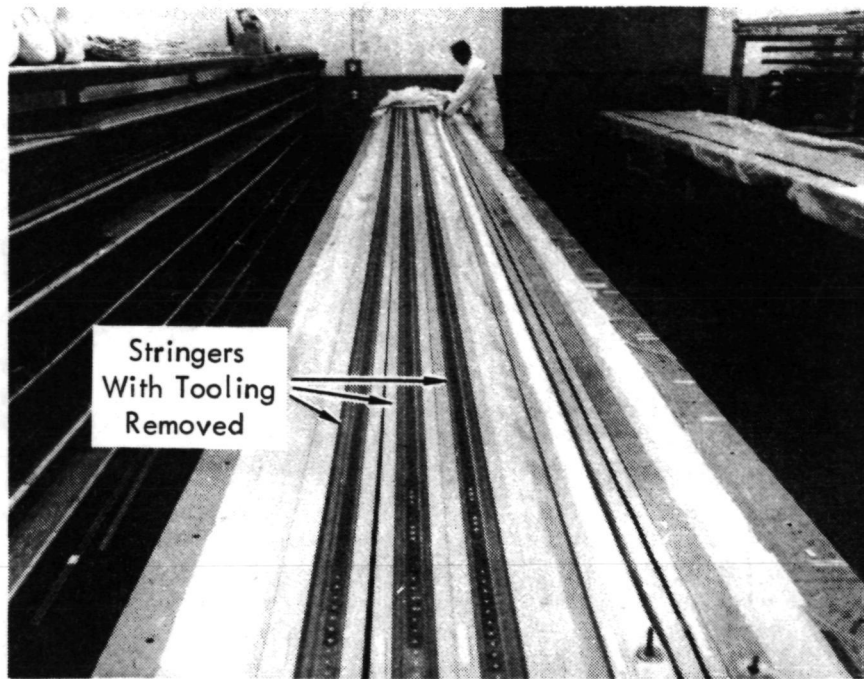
LAMINATE-TO-STRINGER BOND LOAD BEING UNLOADED
